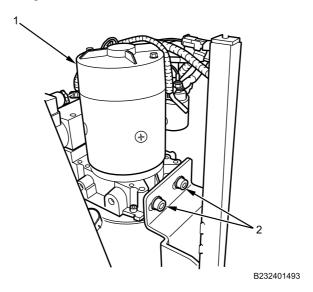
Rear Door/Ramp Hydraulic Pump Mounting Bolts.
